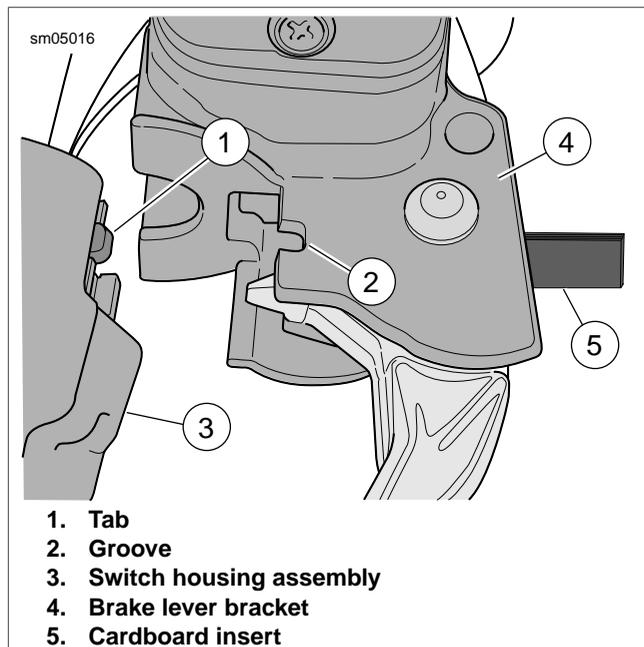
Remove Master Cylinder/Brake Lever Assembly
